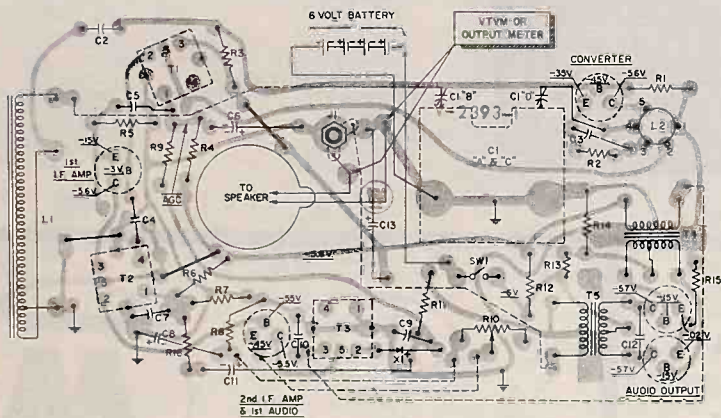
BOTTOM VIEW OF PRINTED CIRCUIT CHASSIS SHOWING COMPONENTS SYMBOLICALLY
